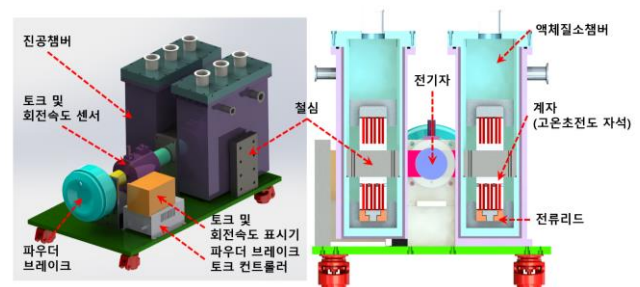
Conceptual three dimensional design of a superconducting DC rotating machine with HTS magnets.
